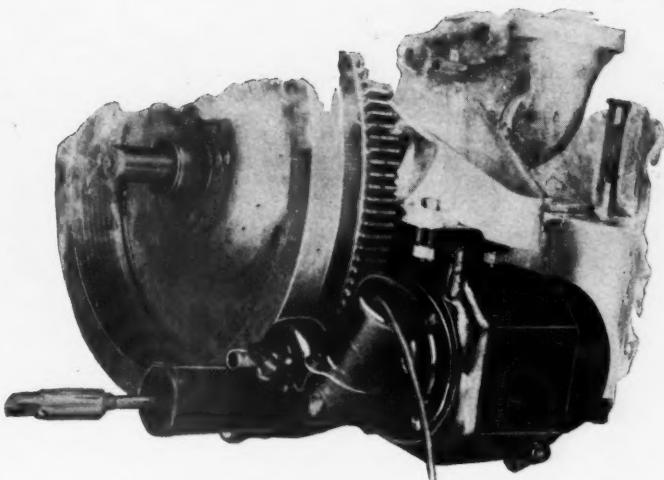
AUTO-LITE CRANKING MOTOR ON OVERLAND
